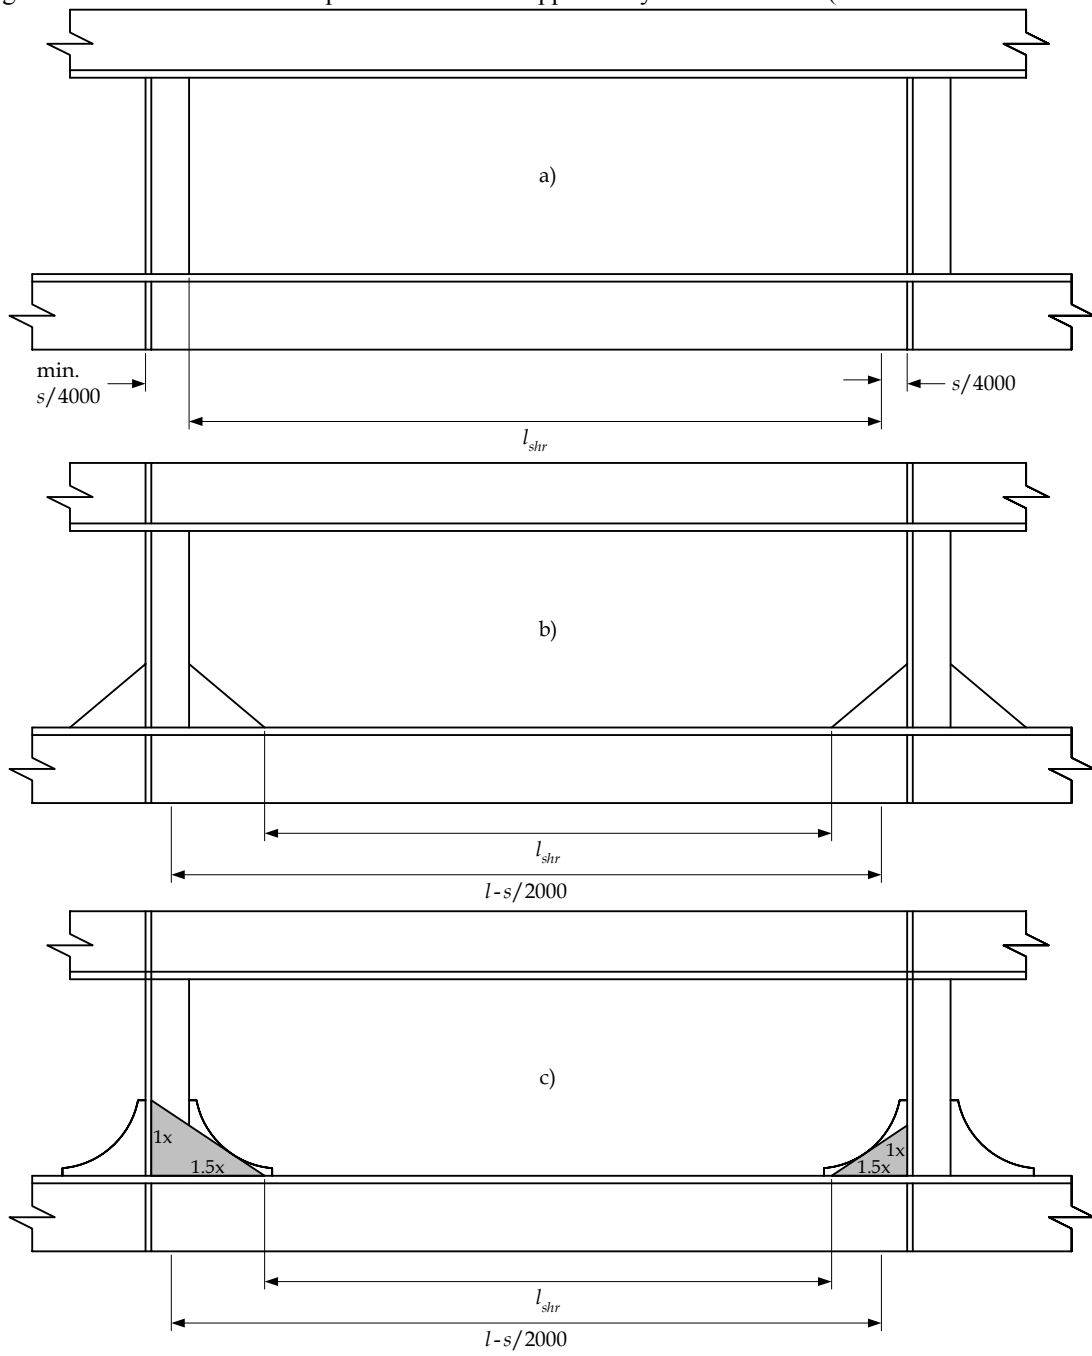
Effective Shear Span of Stiffeners Supported by Web Stiffeners (Single Skin Construction)
